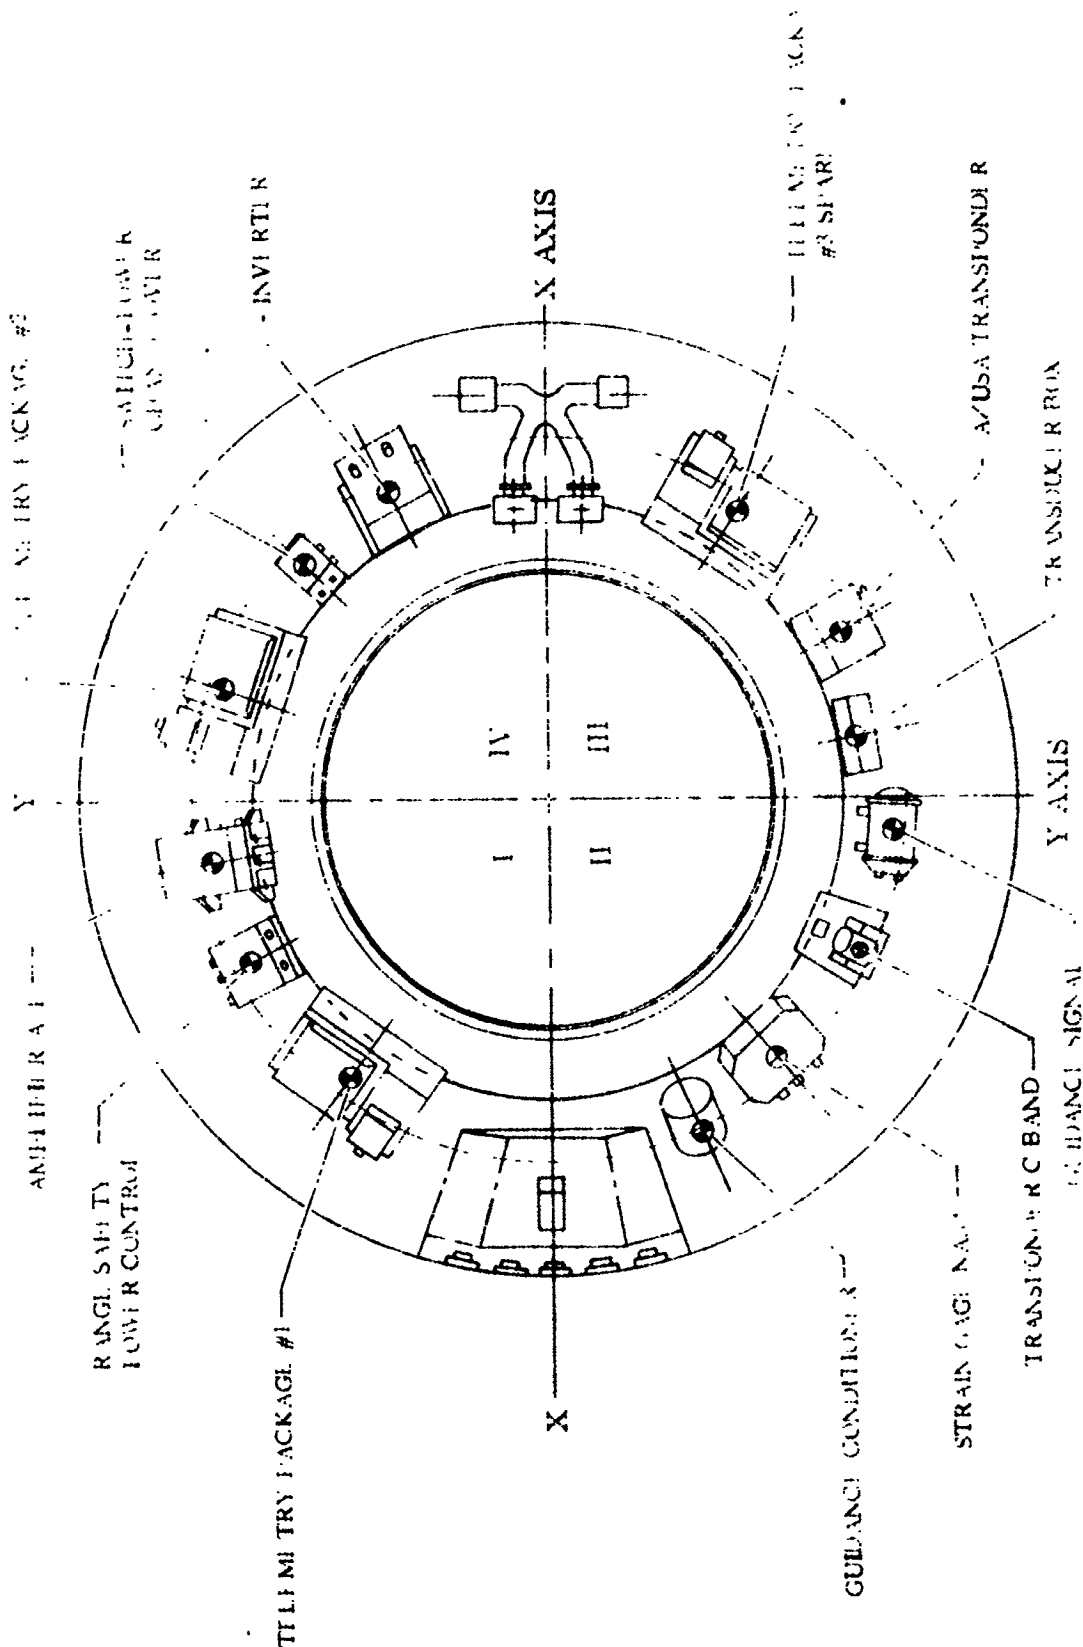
Lower Tier Equipment for AC-6 - View I Looking Aft
